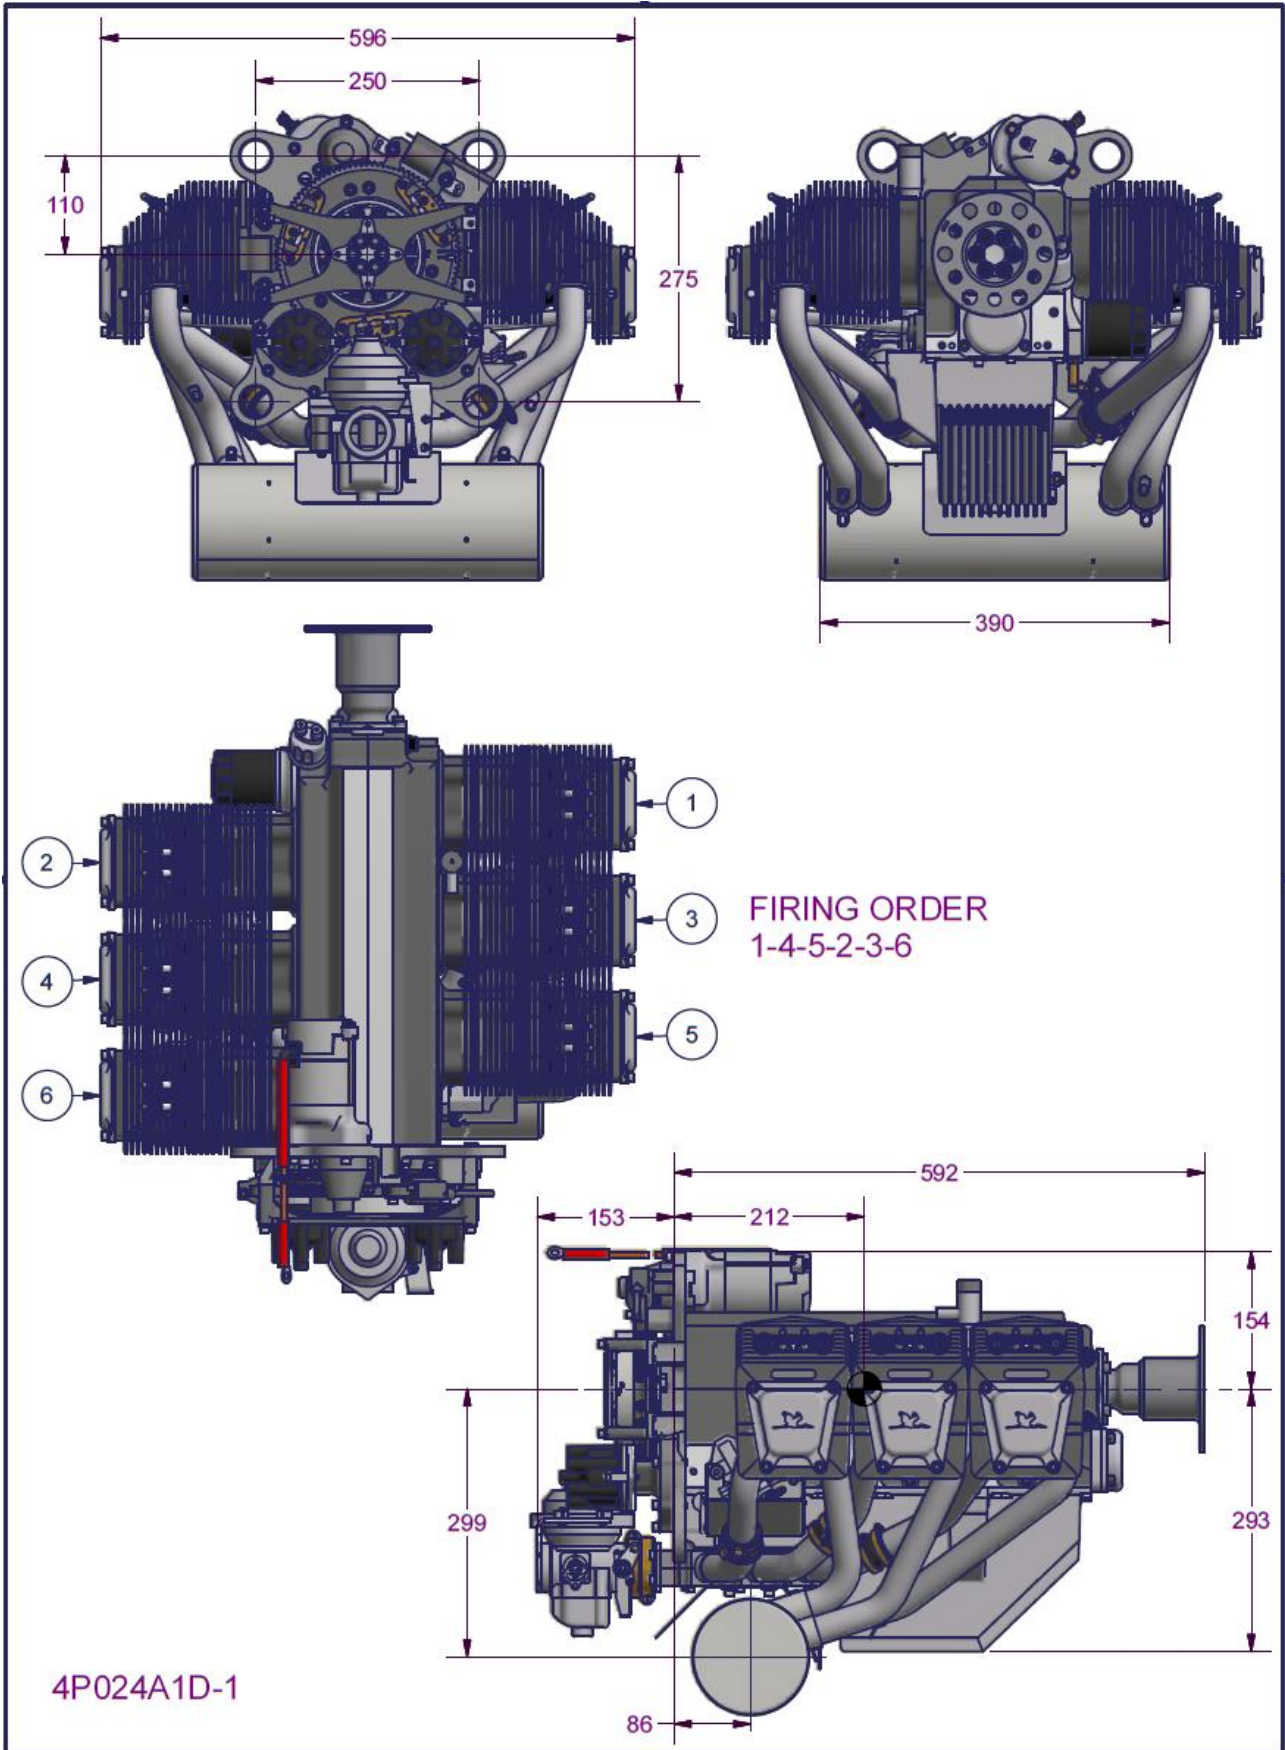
3300 Gen 4 Engine dimensions and layout
